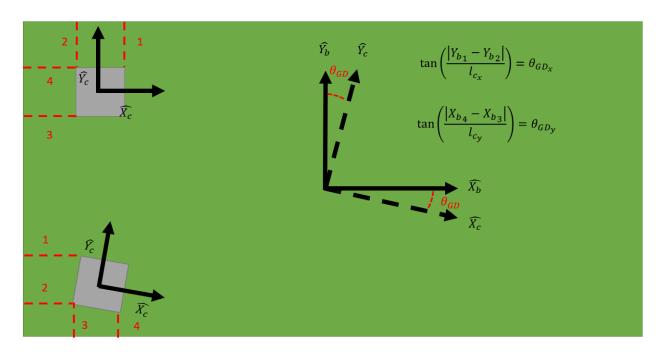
Geometric Model for Component Mounting and the Required Measurements
